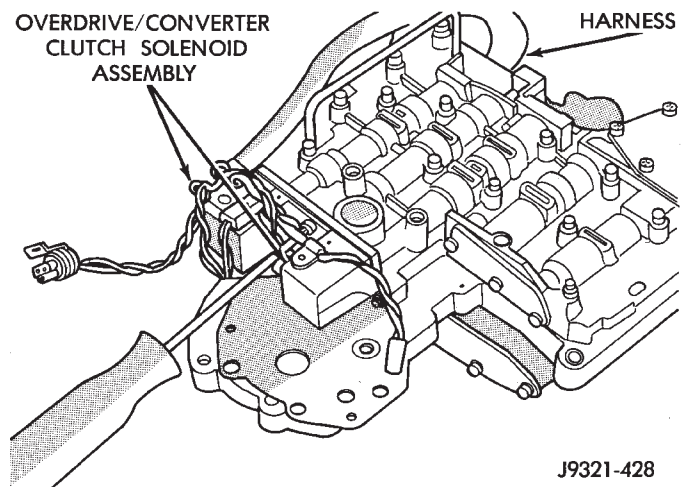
Removing Overdrive/Converter Solenoid Assembly Screws
